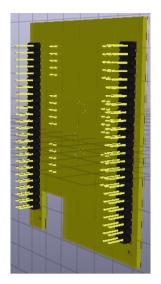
A 3D view of the Bottom Layer of the cape PCB
